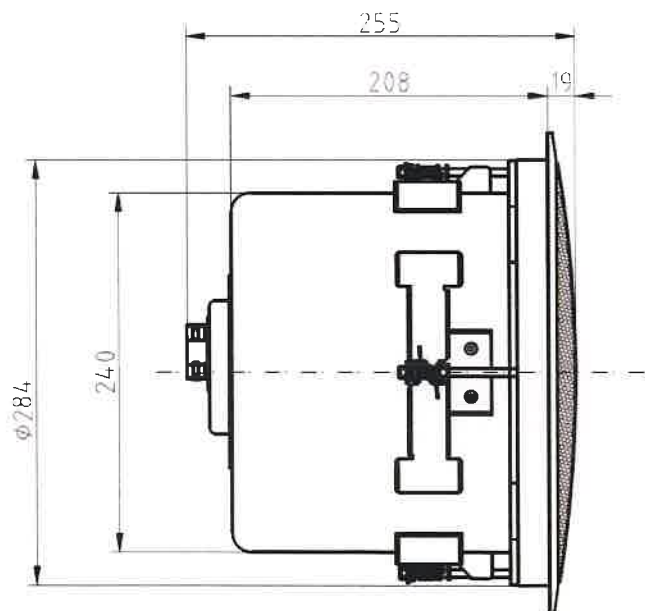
Overall dimensions of the loudspeaker type DL-BR-SUB 120/T-EN54.
